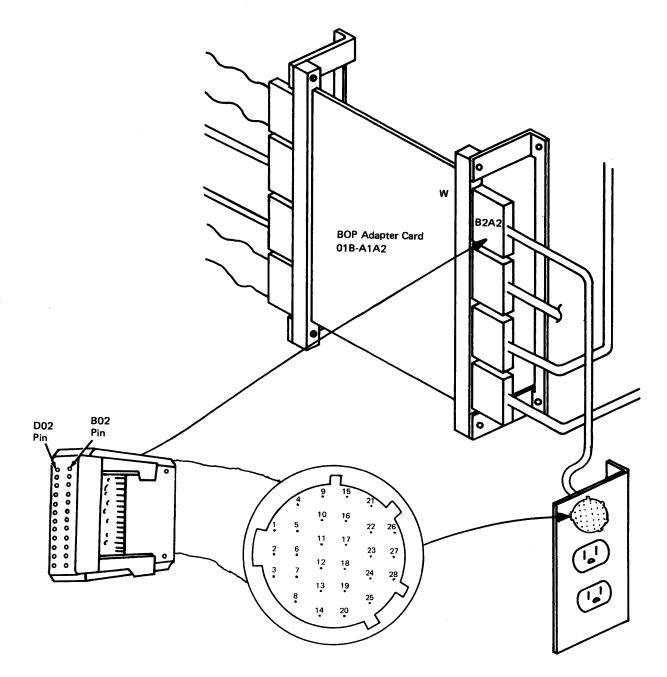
BOP Adapter Card Cable-to-MD Socket
